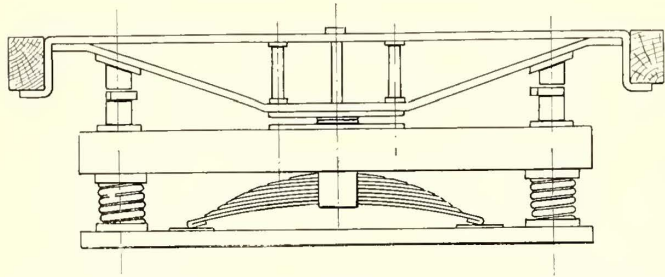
ARRANGEMENT OF BOLSTER SPRINGS FOR NARROW BOLSTER
